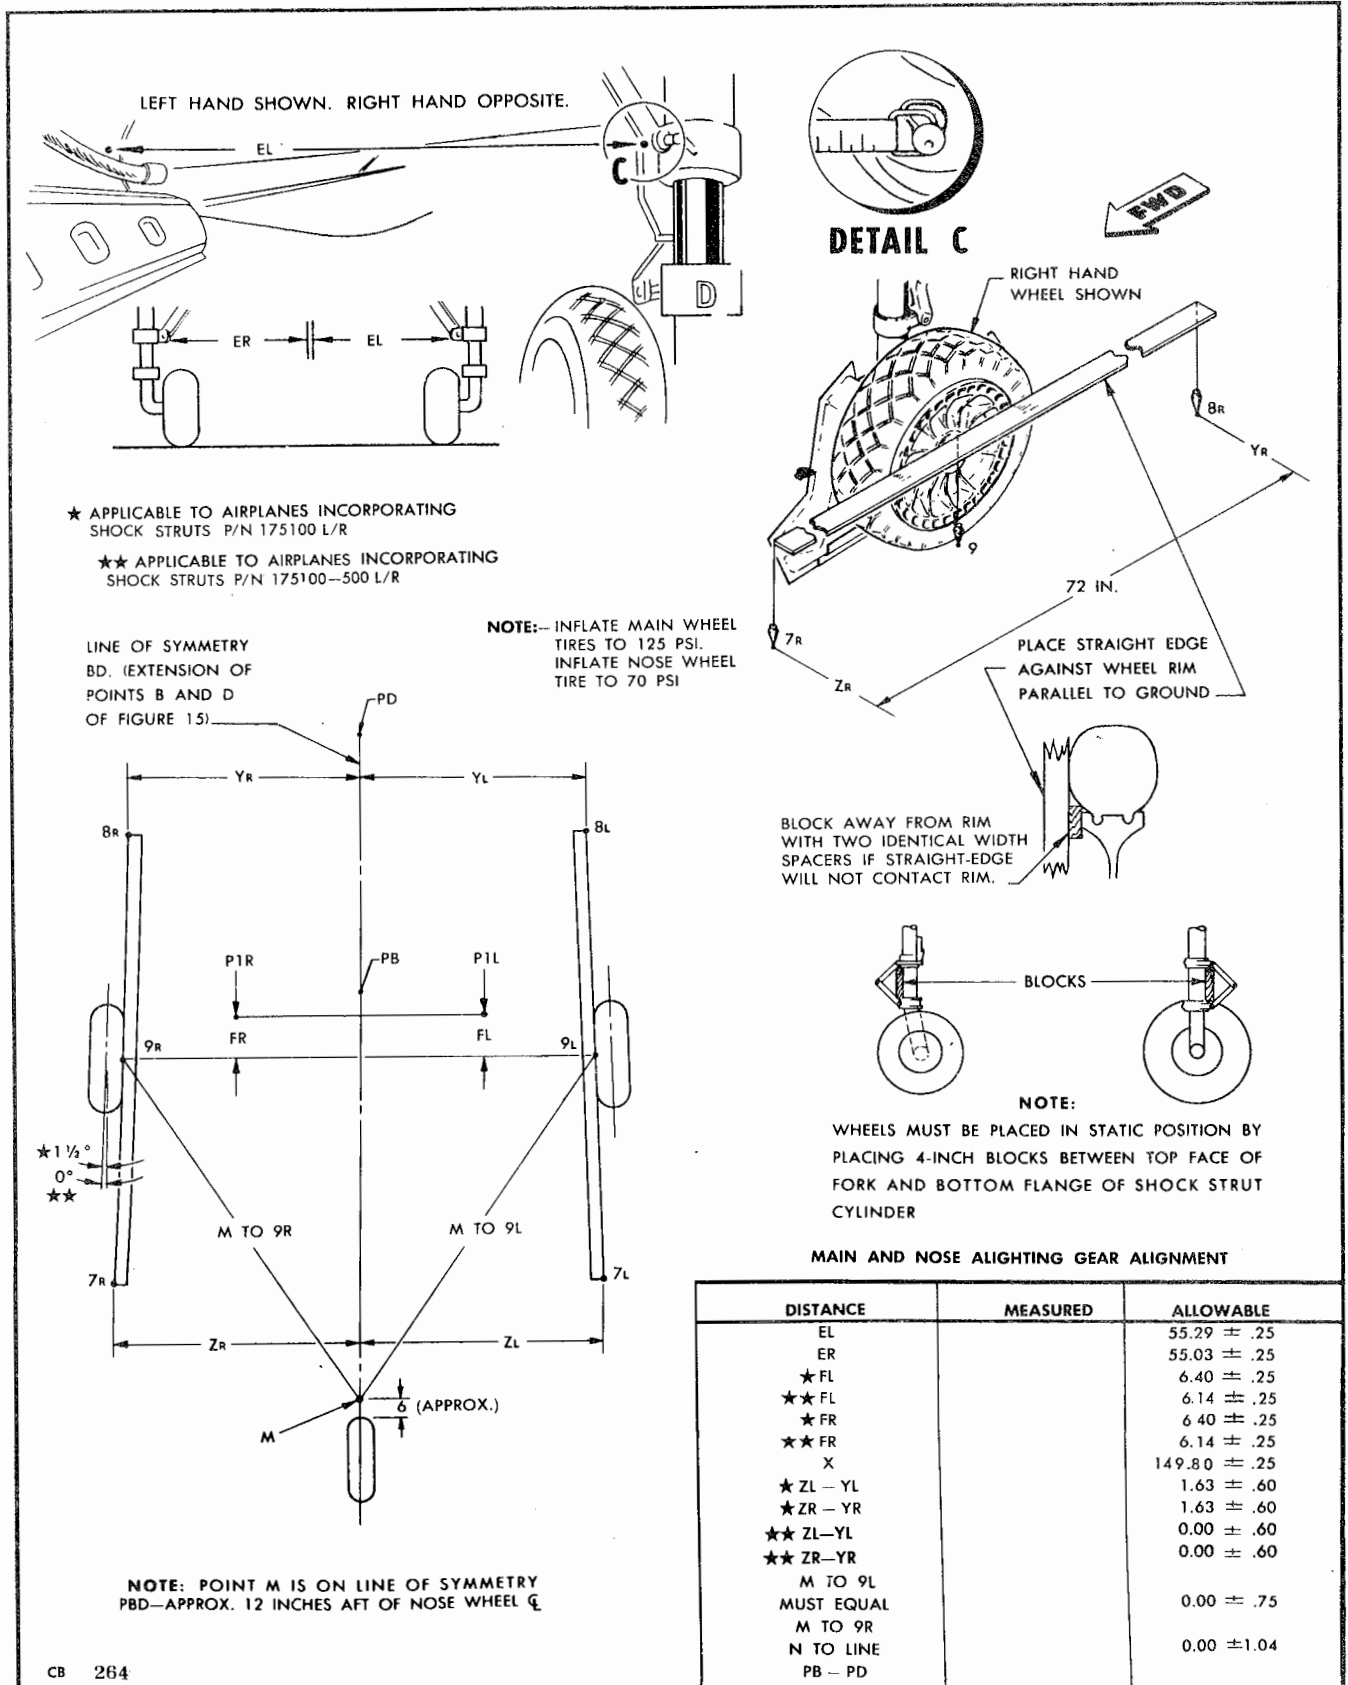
(Sheet 1 of 2 Sheets) — Aligning Gear Alignment
